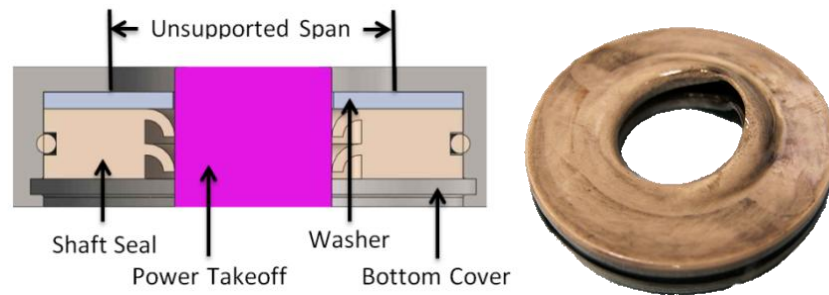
Shaft seal in the bottom cover with washer for unsupported span (left) and failure caused by excessive pressure (right).
